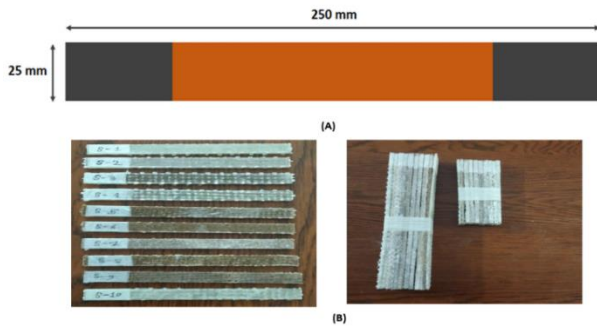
(A) Tensile test specimen according to ASTM D3039 (B) Fabricated samples
